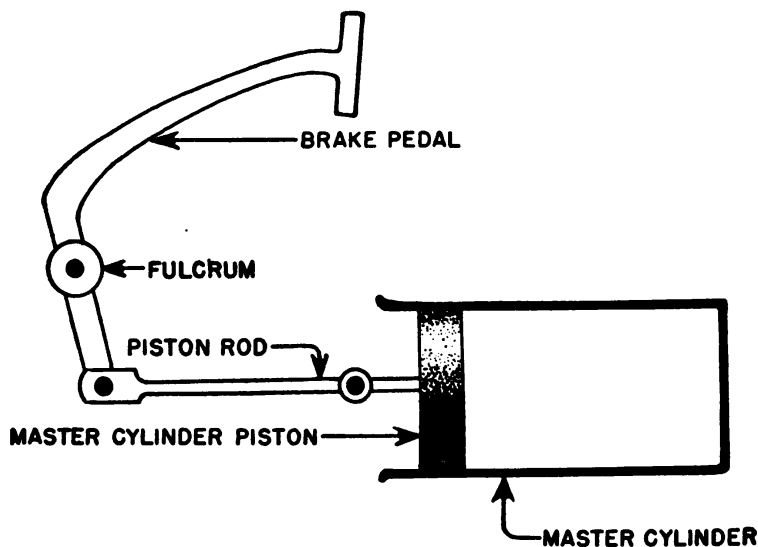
Footpedal linkage to piston in master cylinder.
